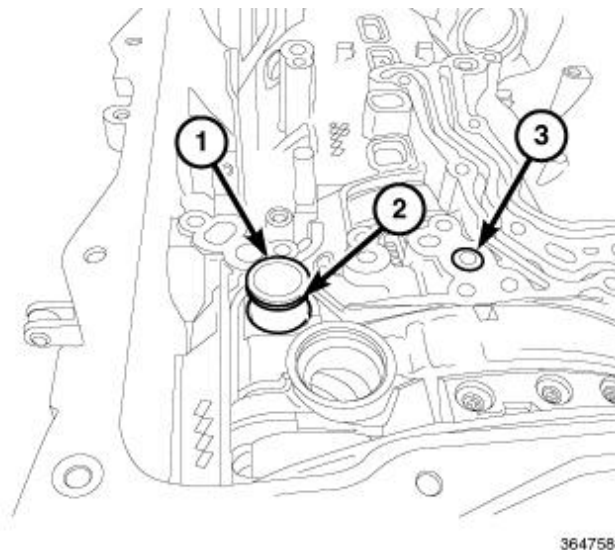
Fluid Port, Two O-Rings, Compression Seal
